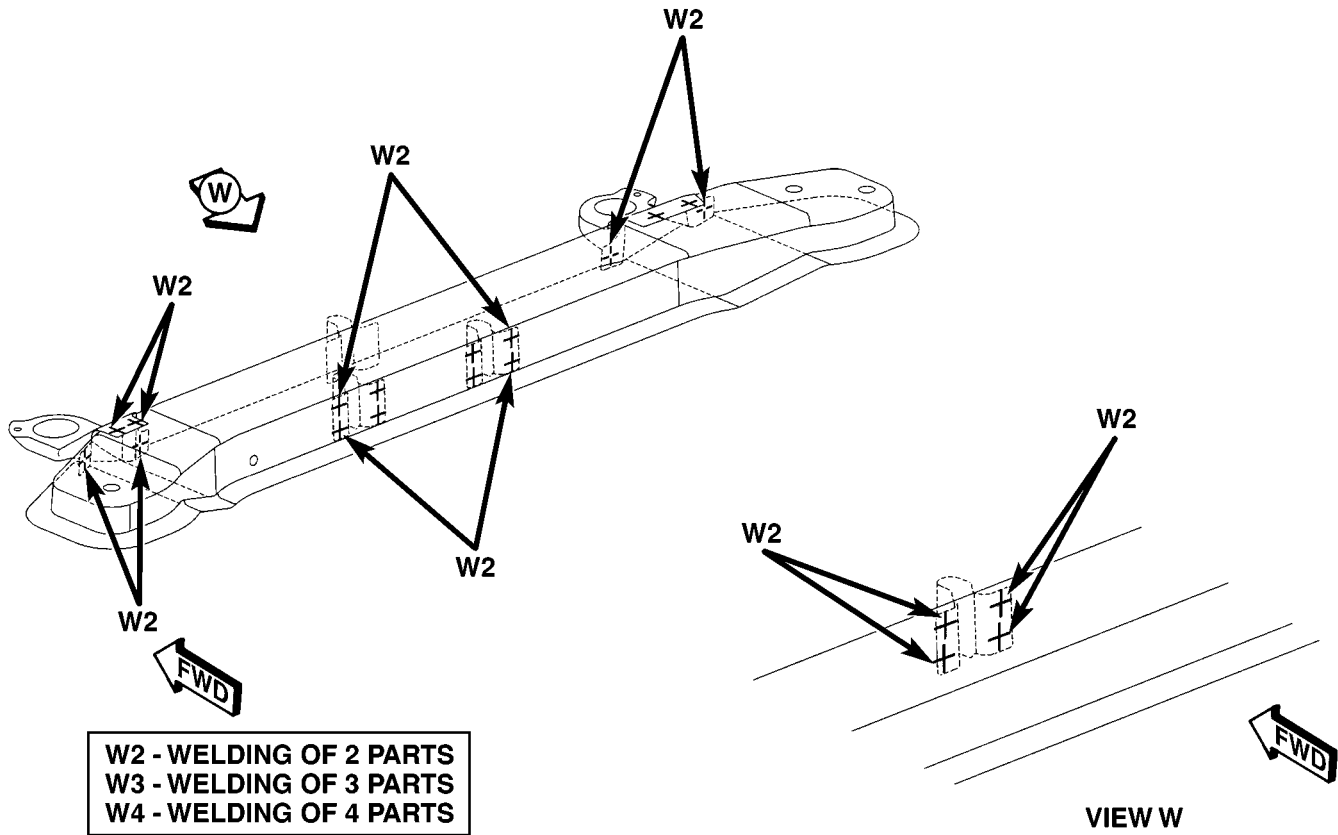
FRONT ENGINE MOUNT SUPPORTS & RADIATOR BRACKET SUPPORT TO LOWER RADIATOR CROSSMEMBER
